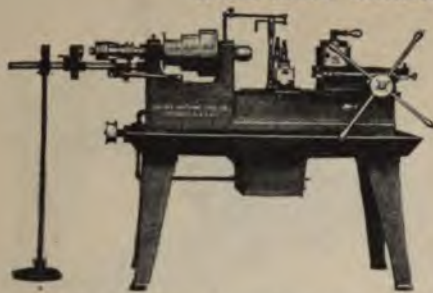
NO. 1 PLAIN HEAD MACHINE.
